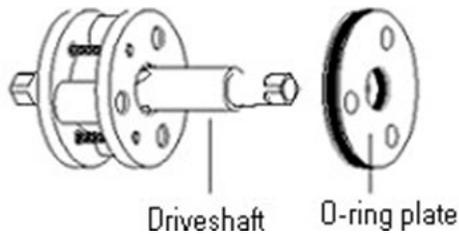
Disassemble O-Ring Plate from Driveshaft
